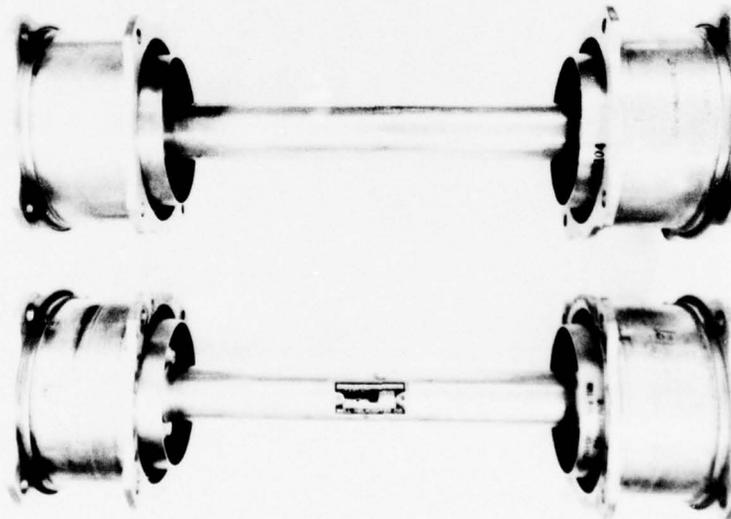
Test Driveshaft Assemblies, 206-040-100.
